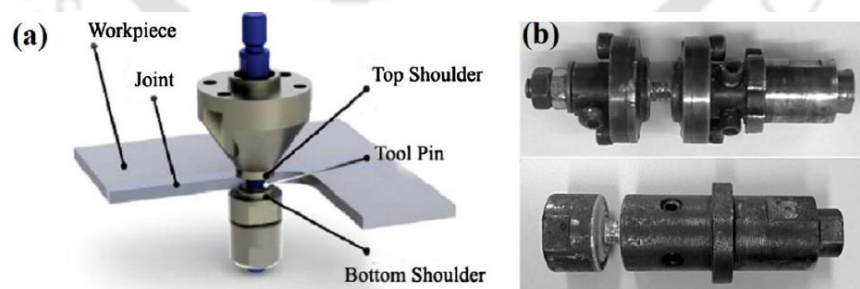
BTFSW process: (a) welding setup (With permission from Li et al., 2014b. Copyright Elsevier) (b) bobbin tools used (With permission from Sued et al., 2014. Copyright Elsevier)
